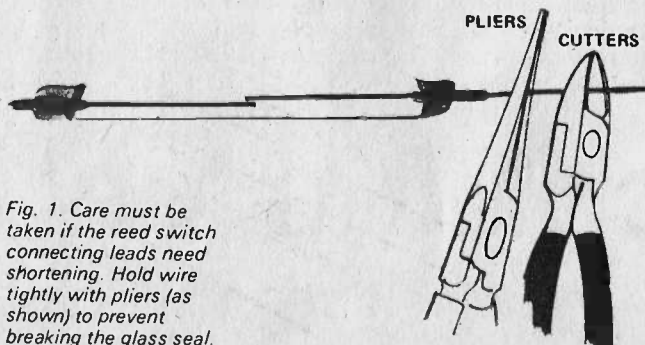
Care must be taken if the reed switch connecting leads need shortening. Hold wire tightly with pliers (as shown) to prevent breaking the glass seal.
